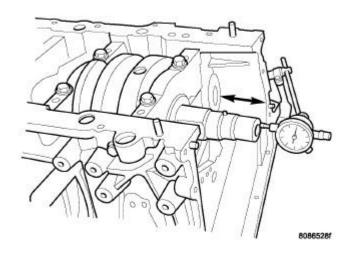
Checking Crankshaft End Play Courtesy of CHRYSLER GROUP, LLC
